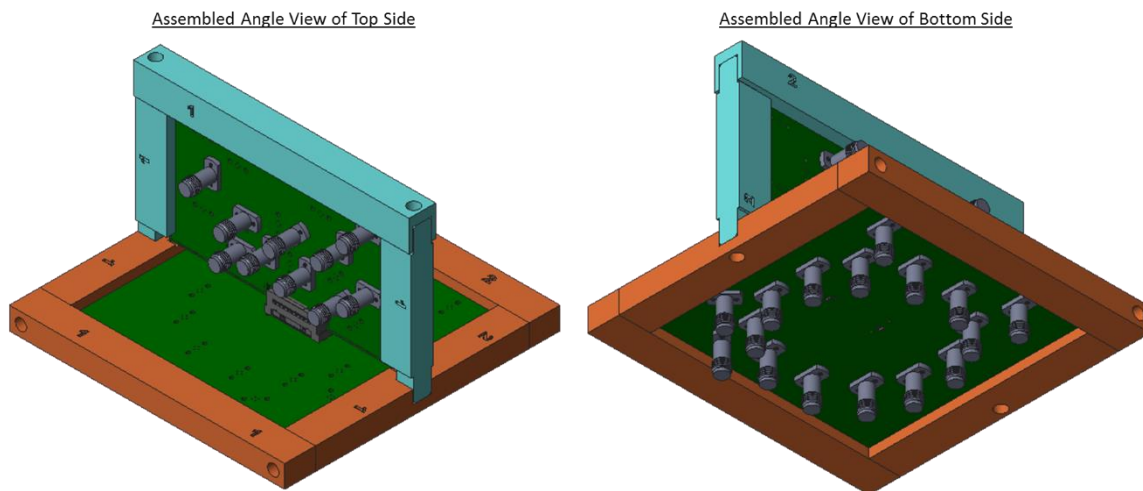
HCB-to-MCB Mated Angle Views with a Representative Mechanical Fixture
